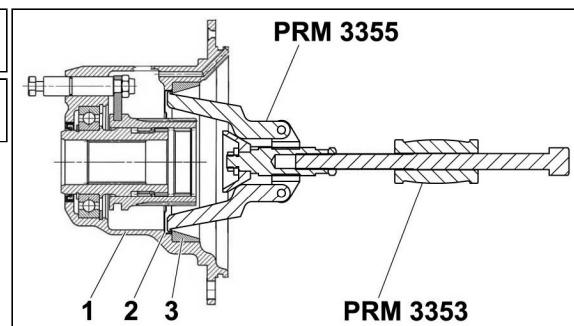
Removal of the front drive shift mechanism cover - 1
